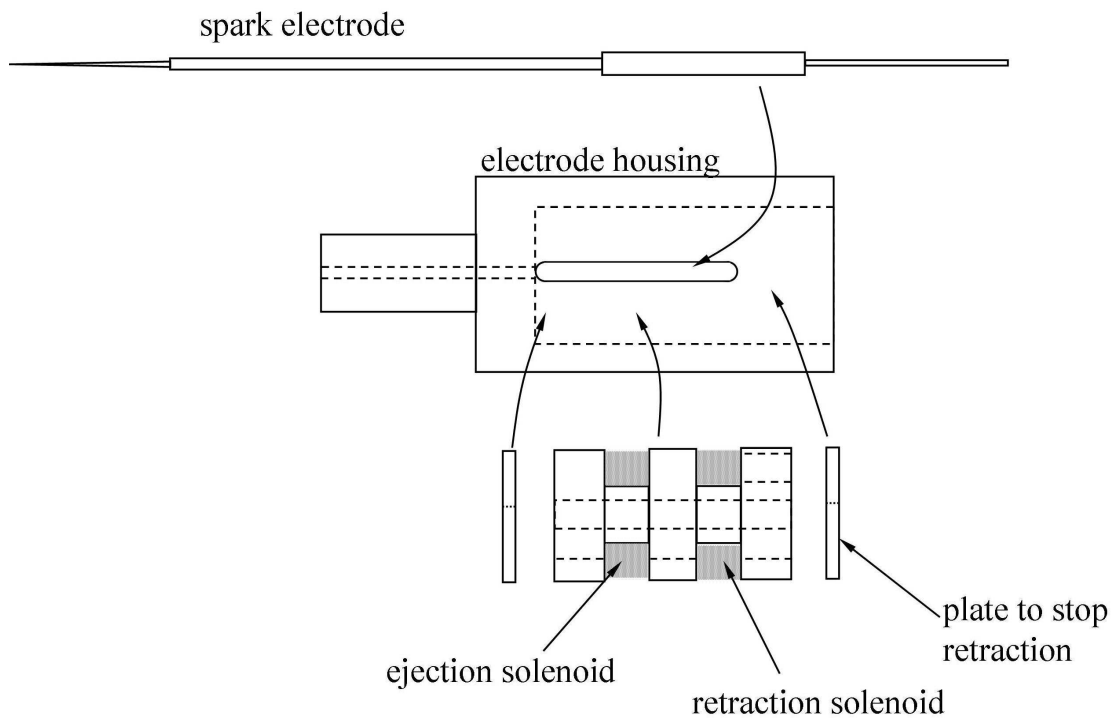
Assembly of the spark electrode, electrode housing, solenoid bobbin, electrode retainer plate, and the solenoids.
